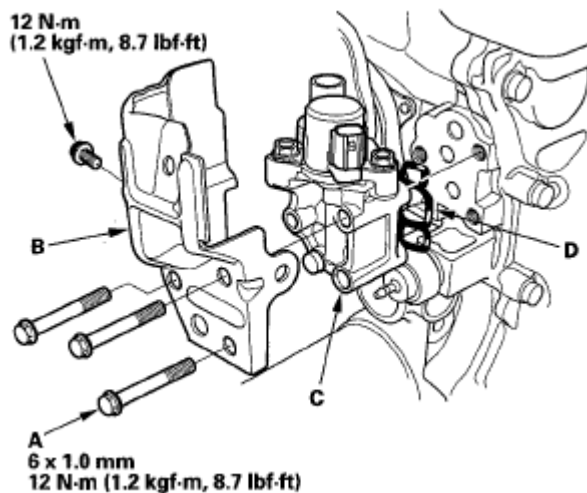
Identifying Rocker Arm Oil Control Solenoid 2P Connector And Rocker Arm Oil Pressure Switch 2P Connector With Torque Specifications
